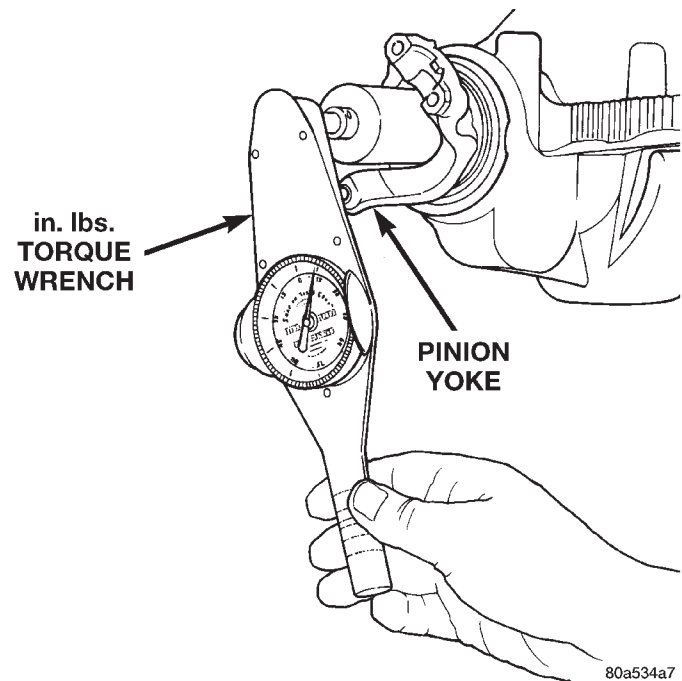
Check Pinion Gear Rotation Torque-Typical
